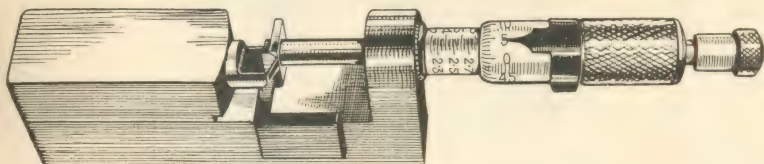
MICROMETER UNIT FOR SETTING CUTTER
